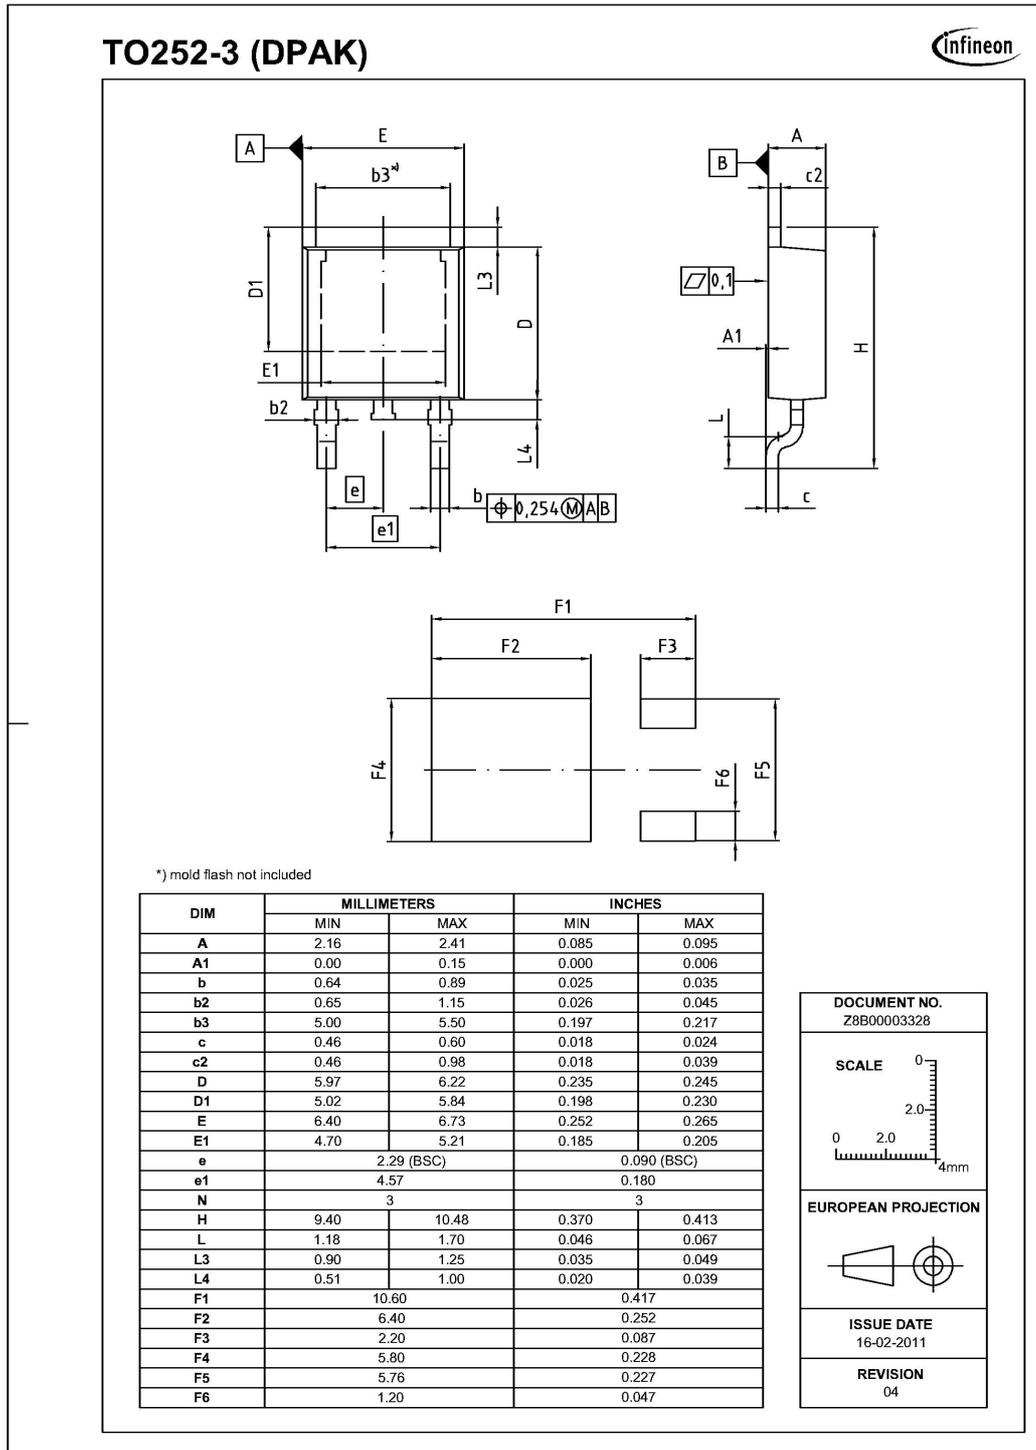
Outline PG-TO 252, dimensions in mm/inches
